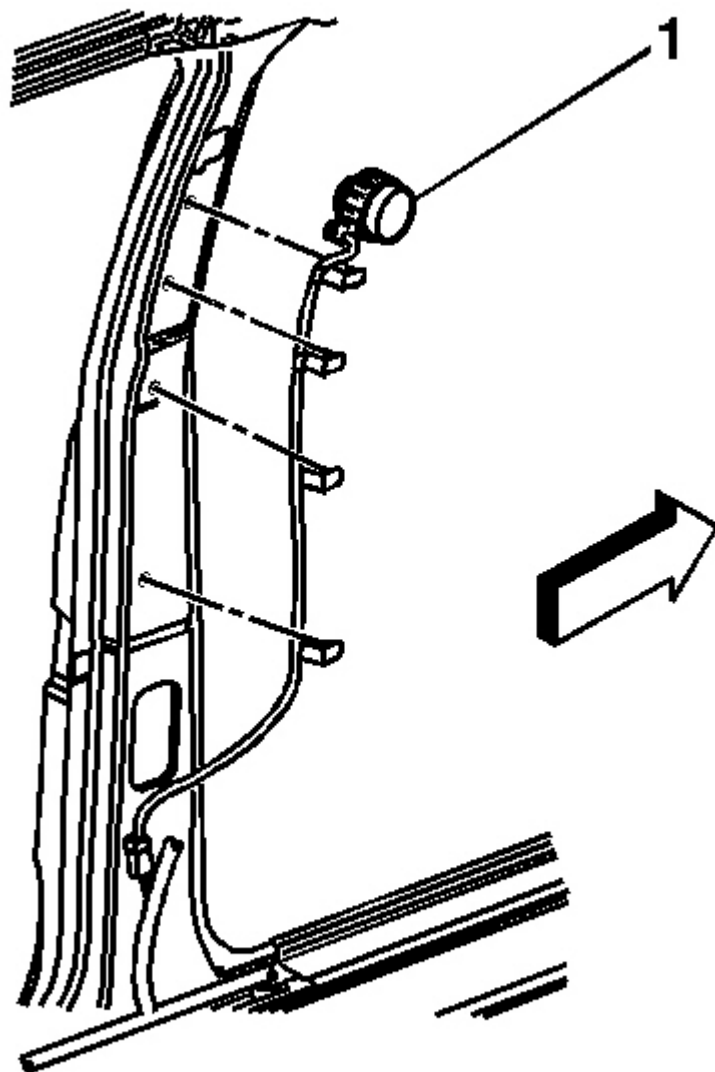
Identifying Inside Air Temperature Sensor Assembly
